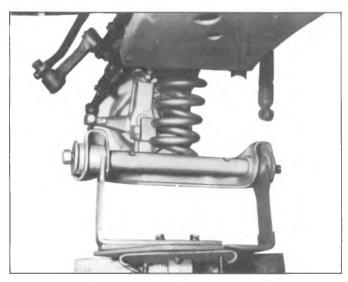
C-24--Lowering Control Arm for Bushing Replacement
